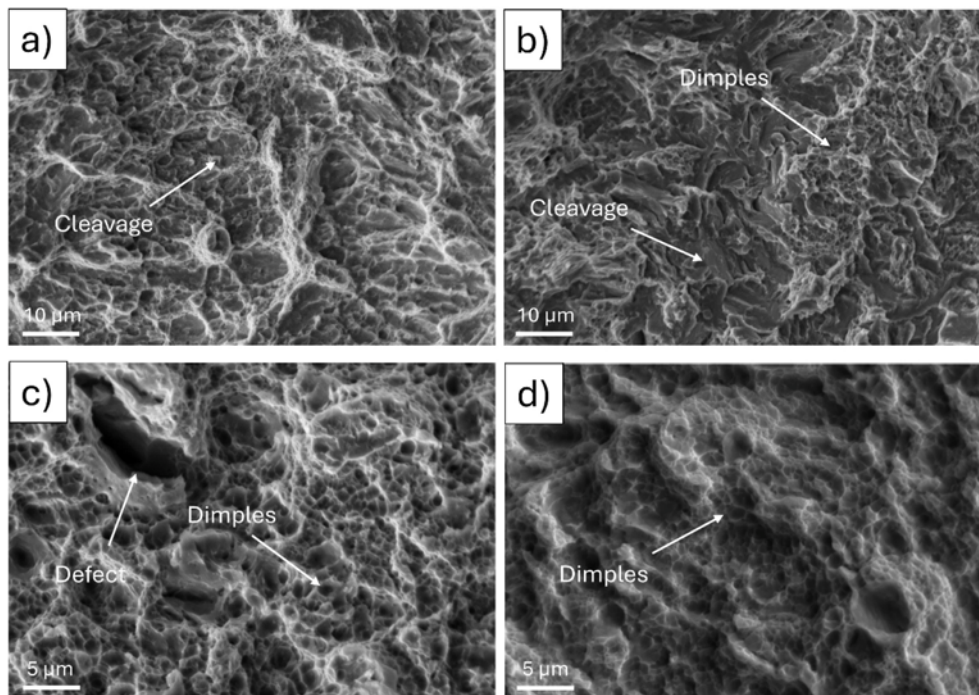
Fracture surfaces. a) AB, b) 250-10, c) 450-10, d) DT.
